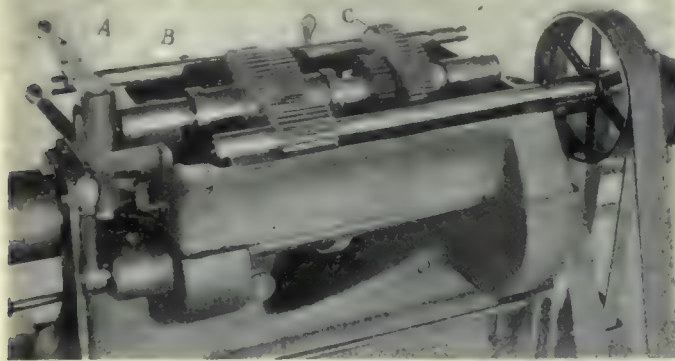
UNIT GEARED HEAD FOR SCREW MACHINES.
